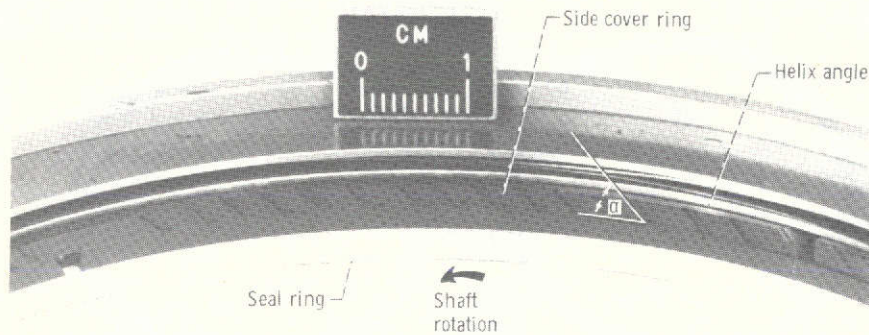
Circumferential seal modified to have helical grooves in side cover ring.
